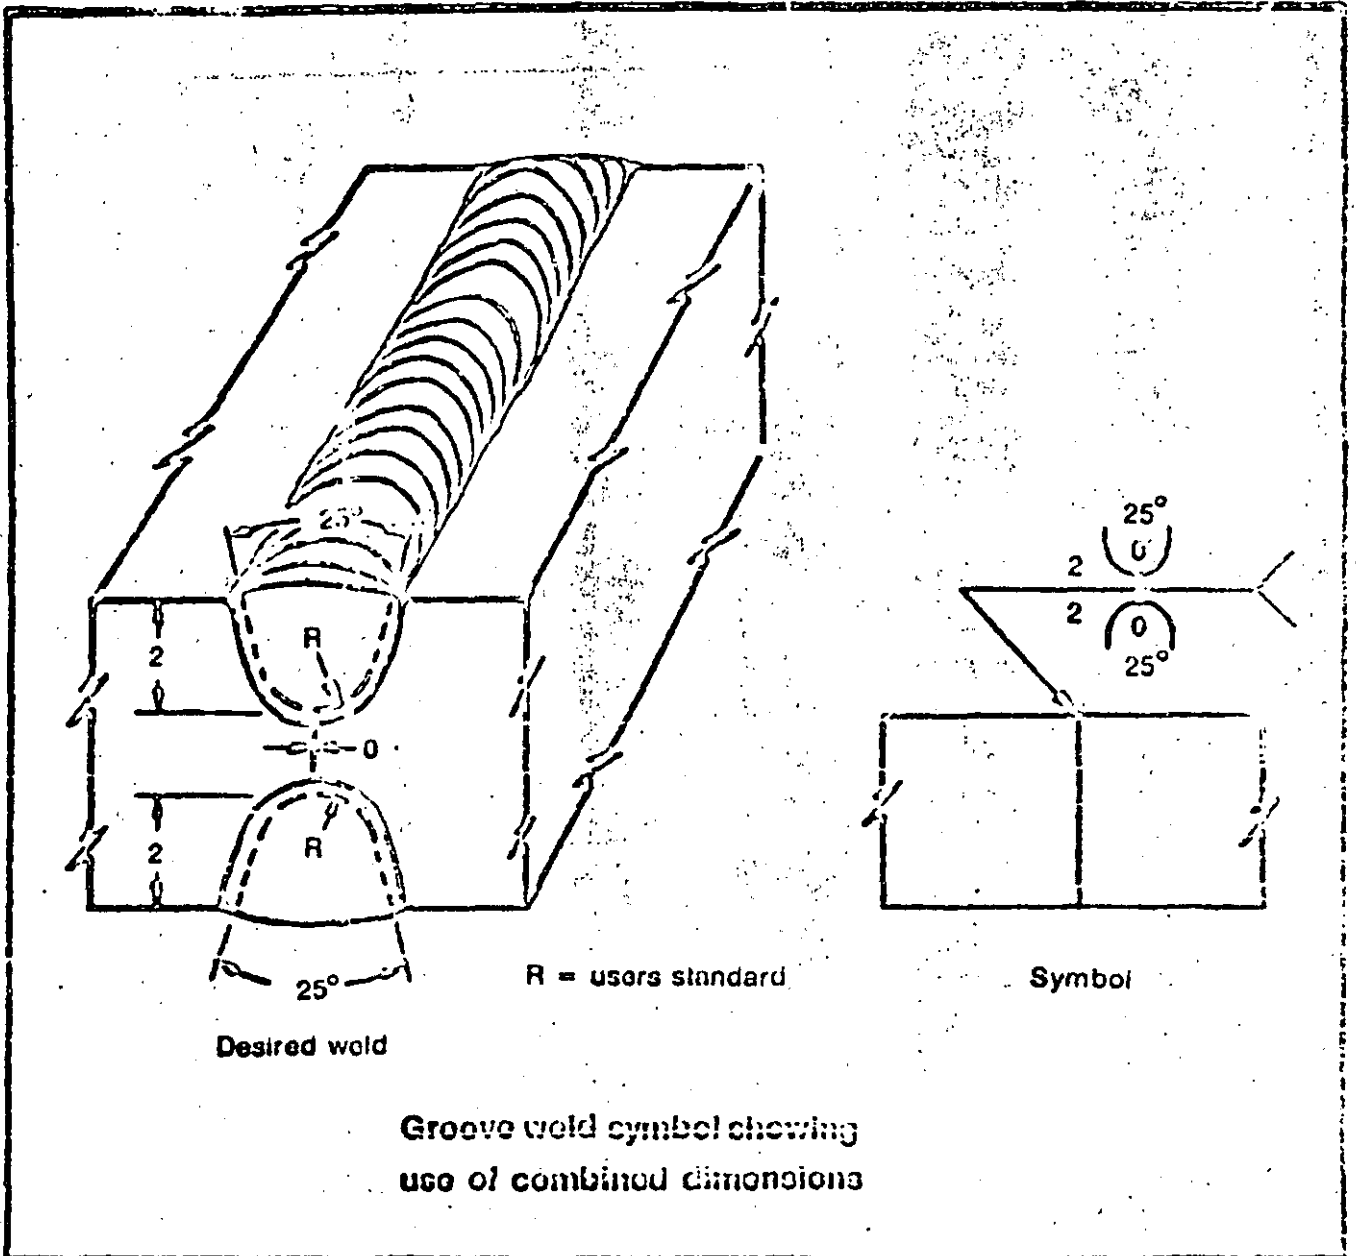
Application of dimensions to groove weld symbols.
